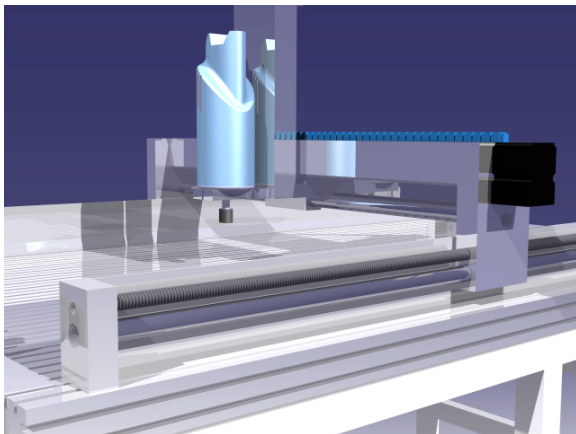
3D CAD model of the engraving machine created in the Catia V5 [6]
